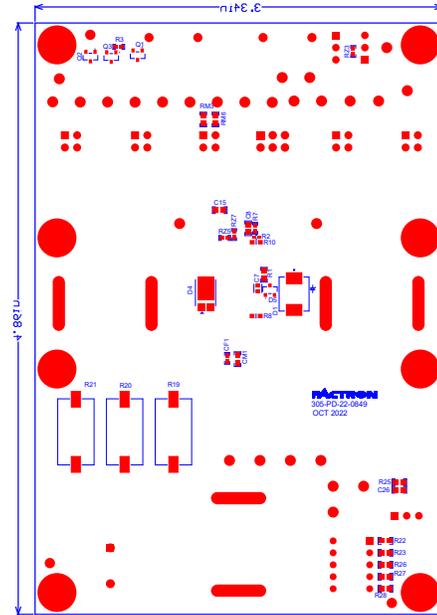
TPS25984EVM Board: Bottom Assembly
